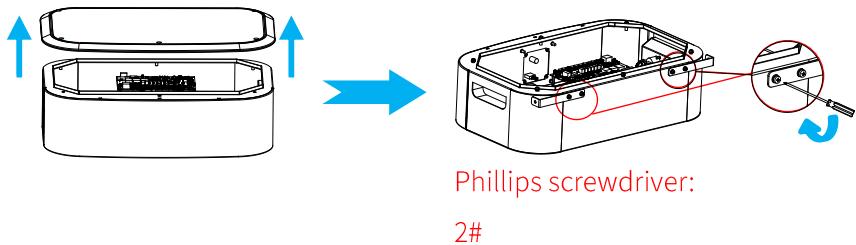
BCU cover removal and installation of wall structure 1 Schematic diagram
